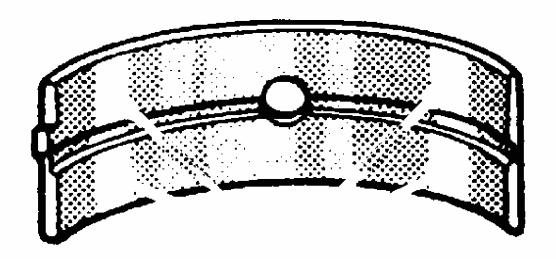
Identifying Connecting Rod Bearing Scoring Or Discoloration Courtesy of GENERAL MOTORS CORP.
